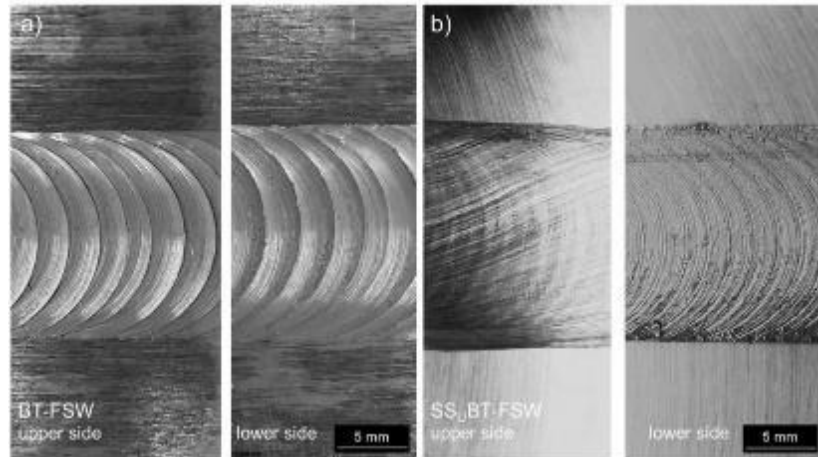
Surface appearance of Al-Li-Cu alloy (AA2198-T851) welded by (a) standard BT-FSW and (b) SSuBT-FSW [31].
